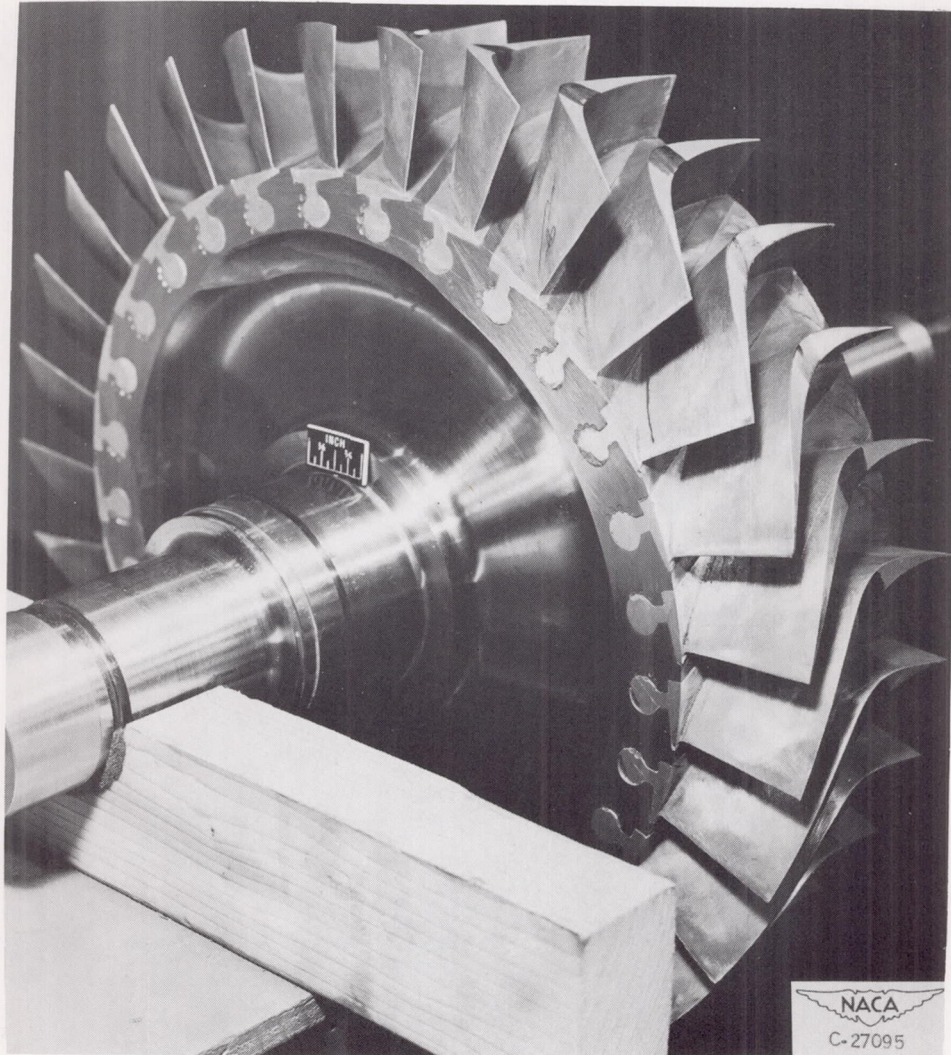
Sixteen-inch supersonic-compressor rotor (rebladed compressor rotor).
